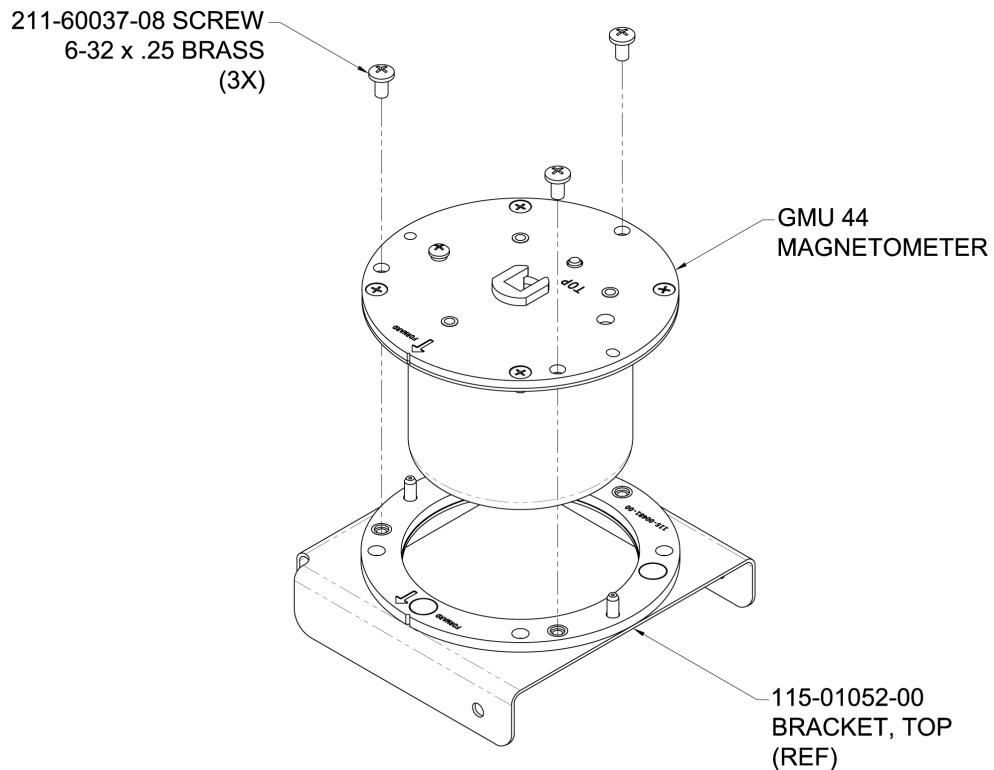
Lancair IV/IV-P GMU 2222 Mounting Bracket
